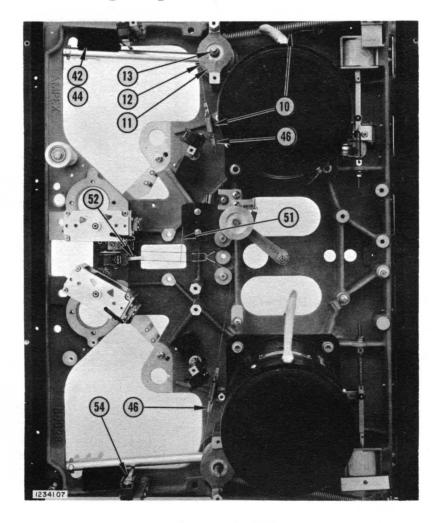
Removing Tension Arm Mounting Assembly and Tape Guides
